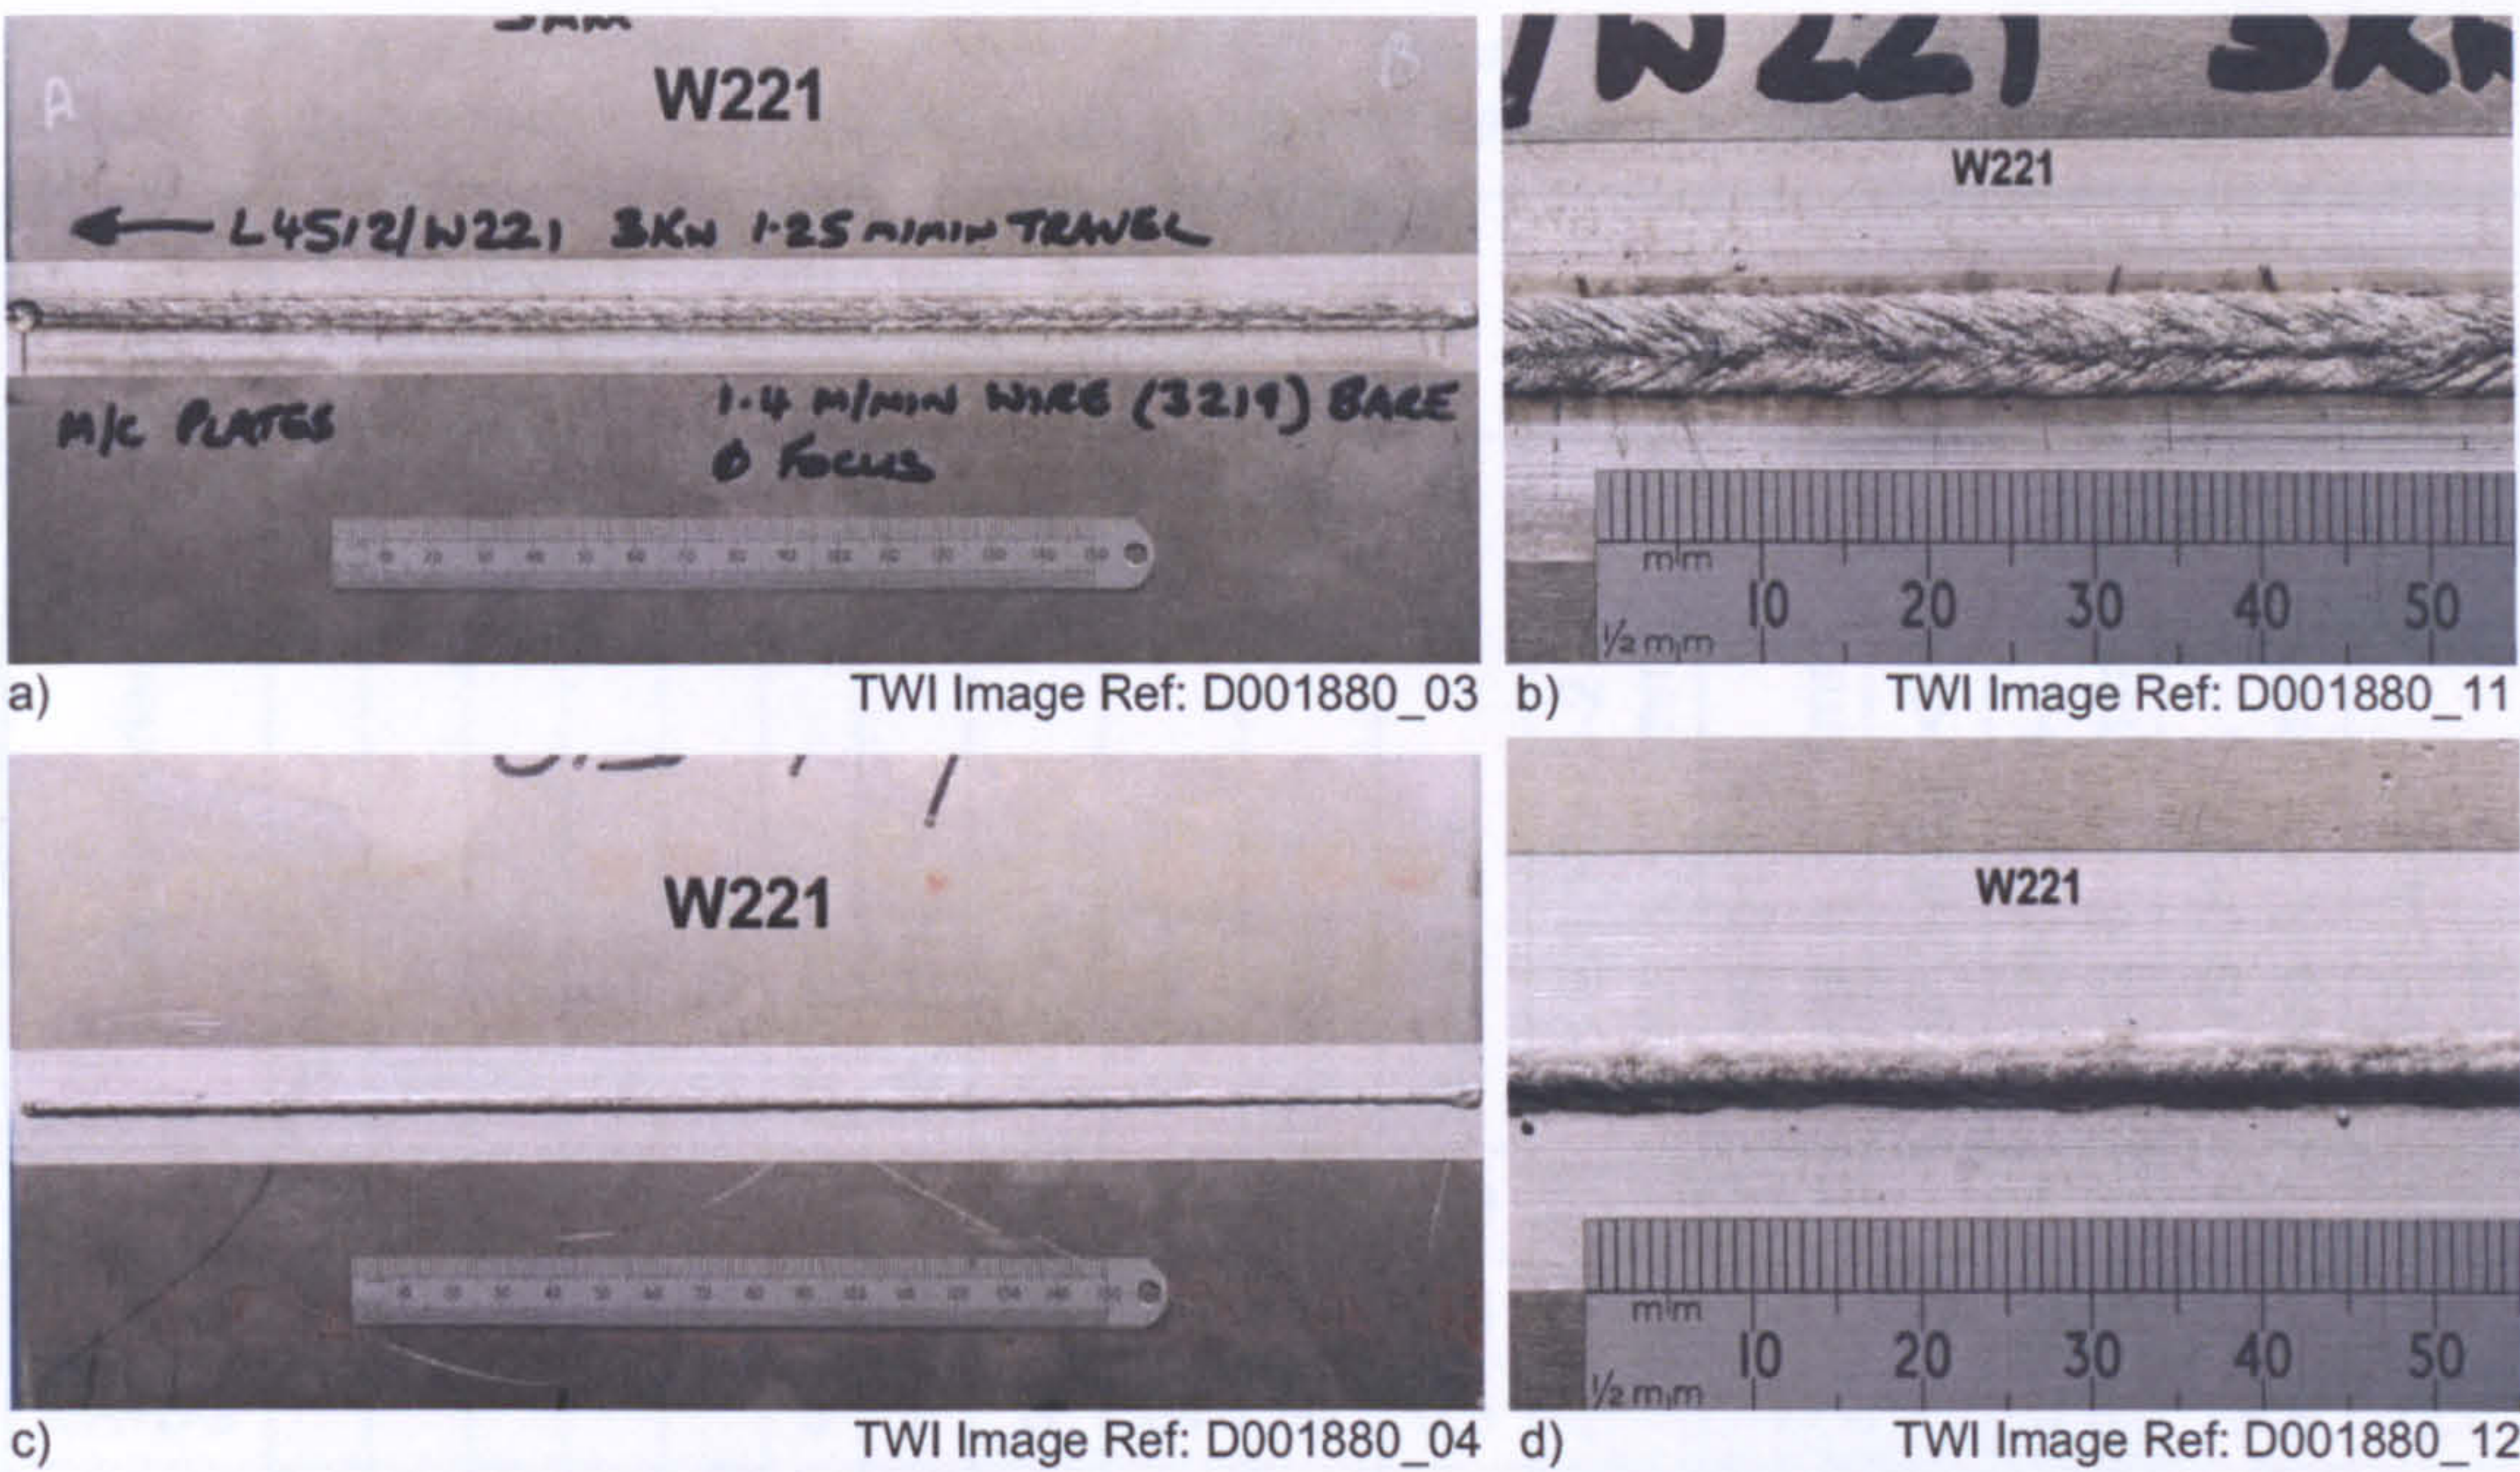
Weld bead appearance of a weld produced on dry-machined samples in 3.2mm thickness 2024 aluminium alloy, using 3.0kW of laser power, Ø0.6mm spot size, focus 0mm, 1.25m/min welding speed, 1.4m/min WFS:
